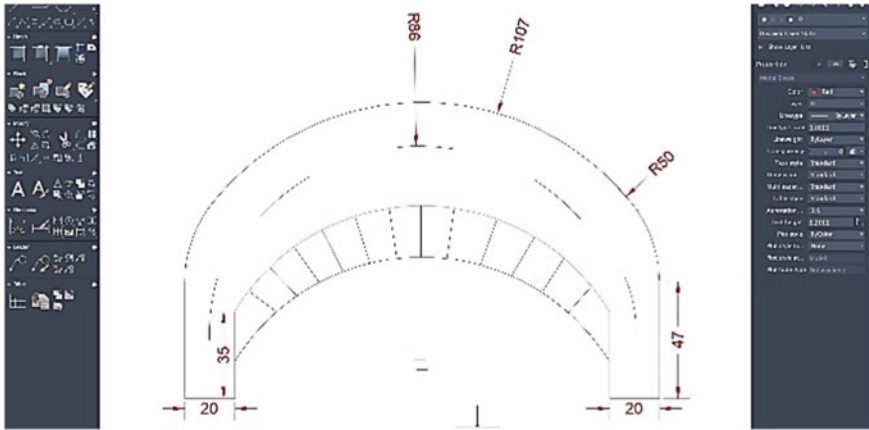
Computer-aided draft of head band top view (all dimensions in mm)
